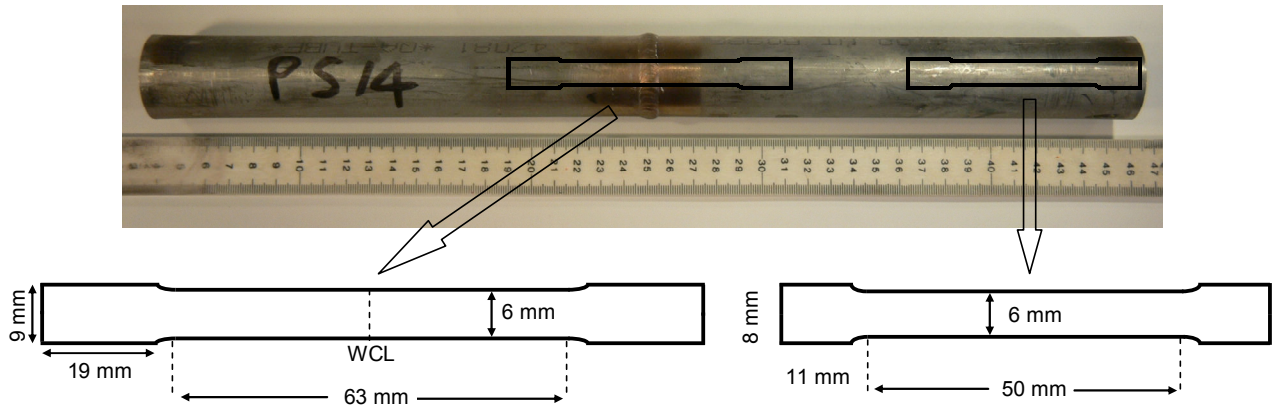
The cut position (top) and the dimensions of the cross-weld test specimens C_0 , C_{10} and C_{20} (bottom left) and tensile specimens B_0 , B_{10} and B_{20} (bottom right). Both types of specimen were 3mm thick.
